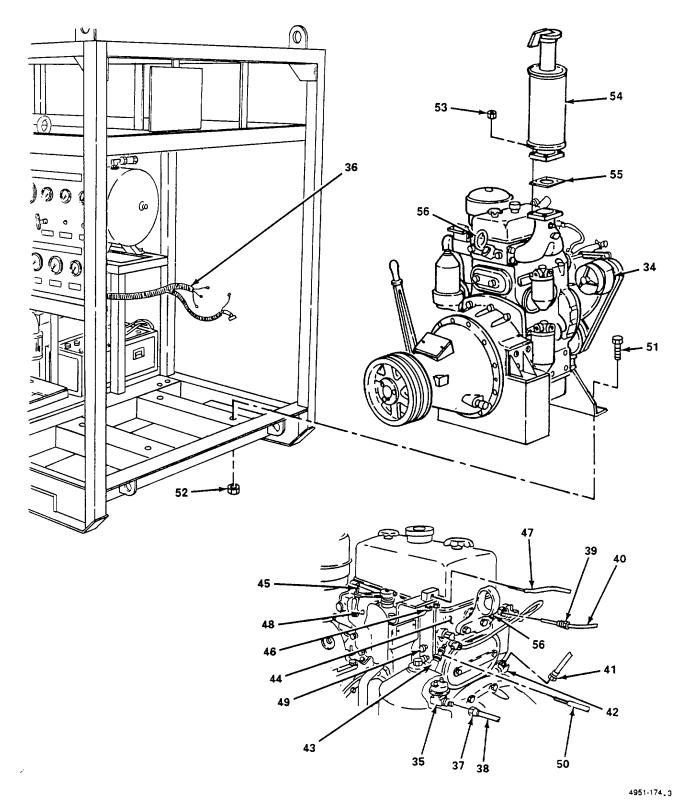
Engine Assembly, Installation (Sheet 2 of 4).
